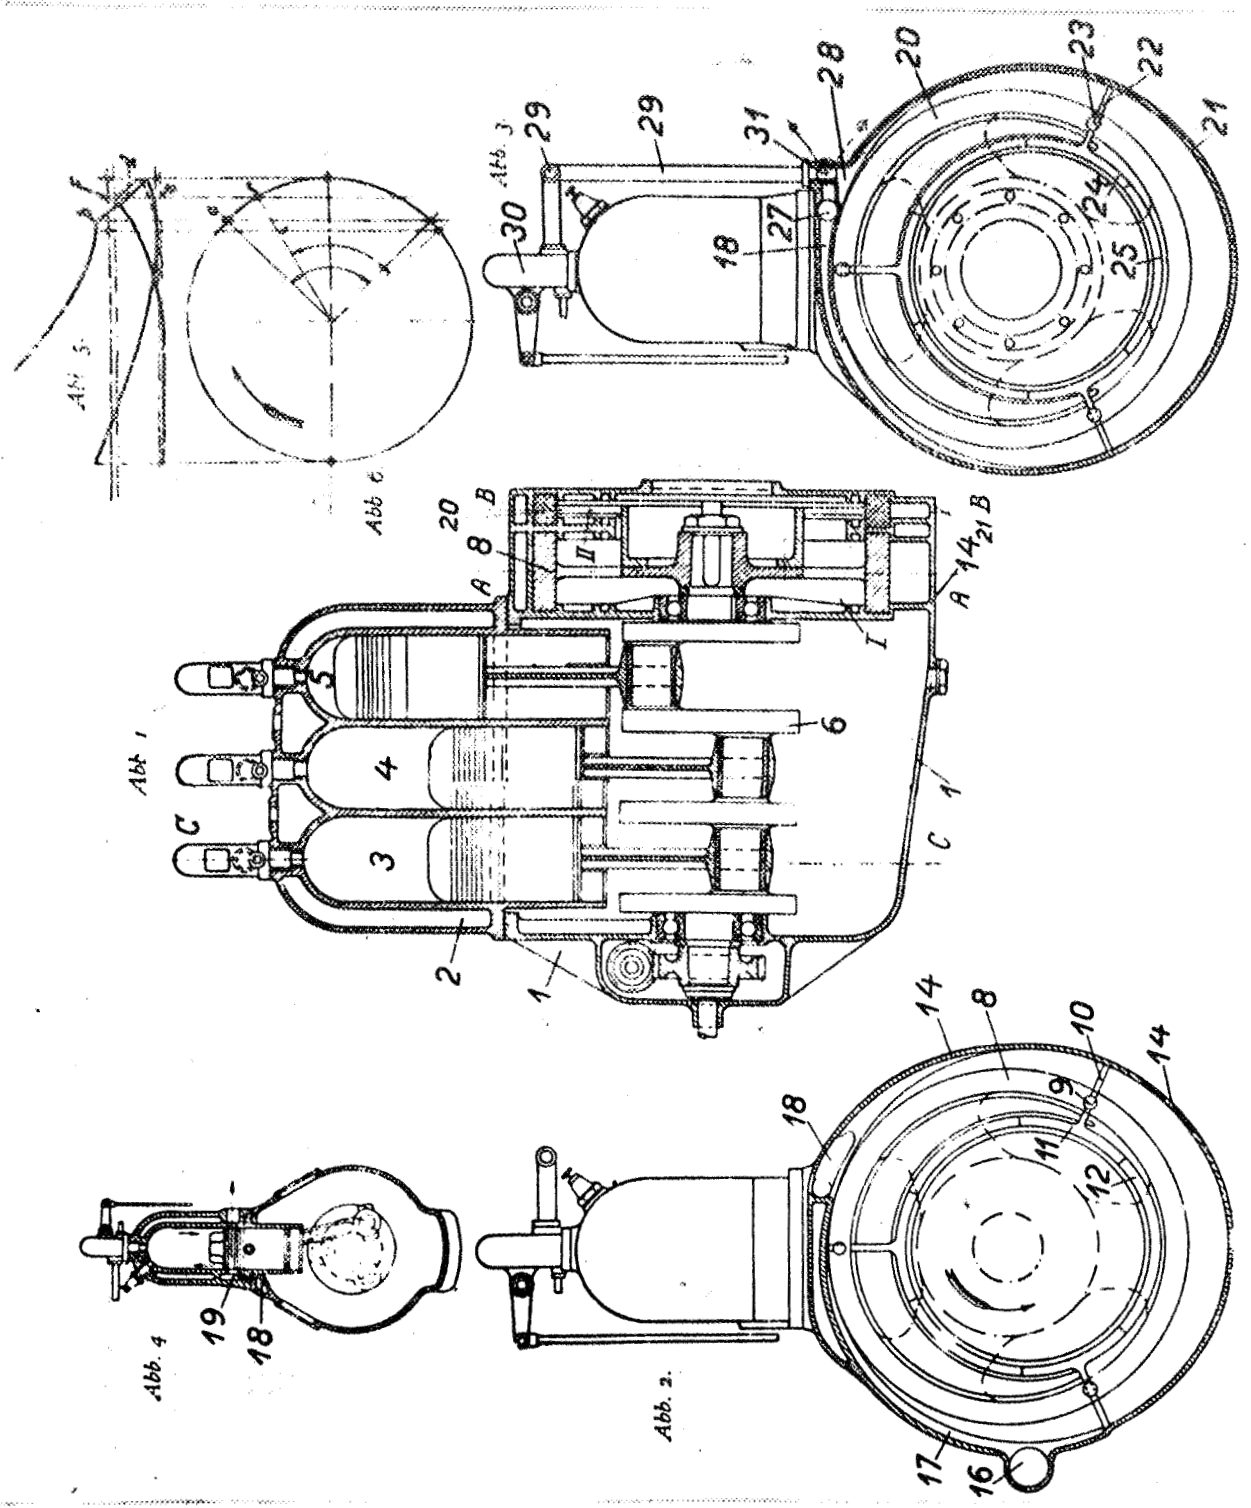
Zoller compressor on flywheel of a 3-cyl. two-stroke engine.
